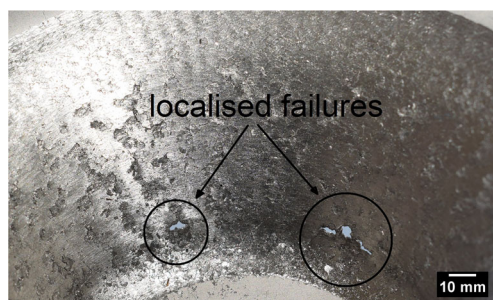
Localised failures on untreated sheet formed by hemispherical head tool rotating
